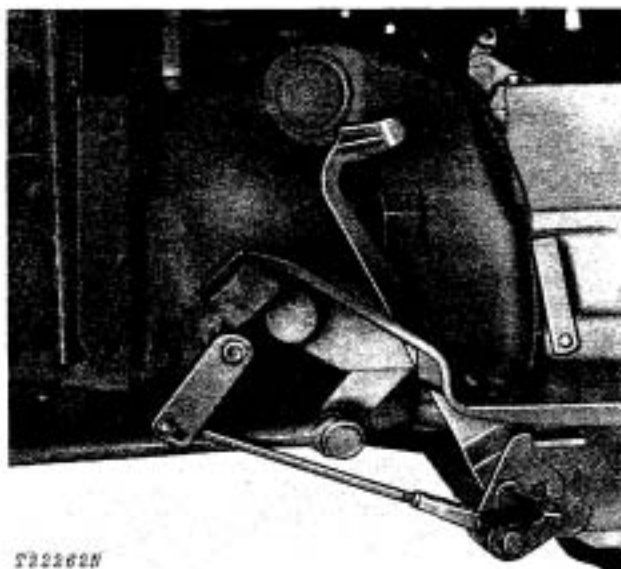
Clutch Pedal Shaft Arm Adjusting Screw
